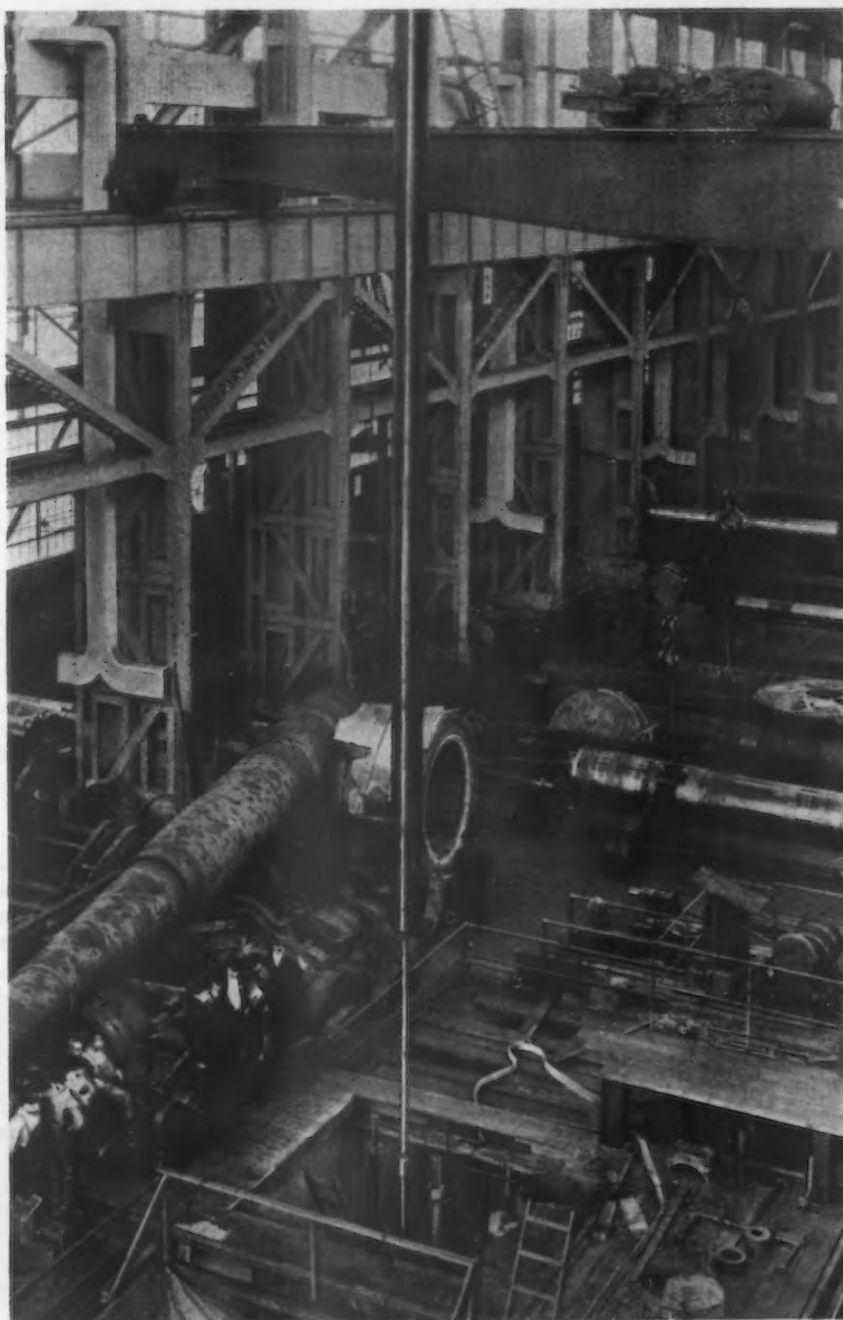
Liner positioned for assembly over the shrinkage pits. ▲ ▲ ▲
